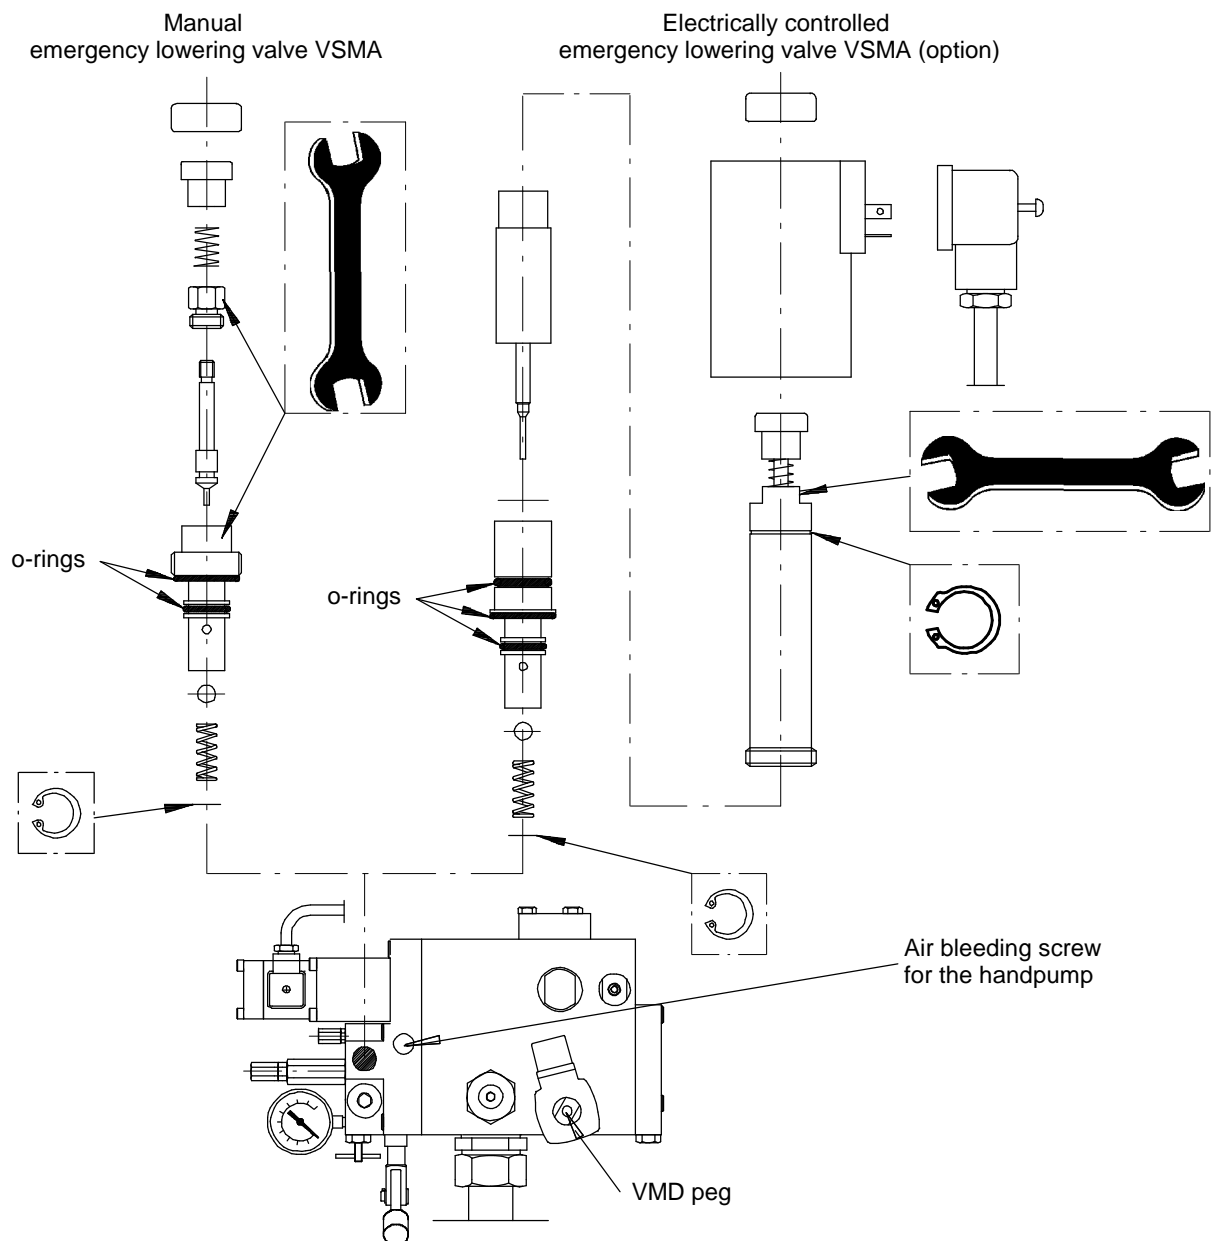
Dismantling of the Emergency lowering valve VSMA
